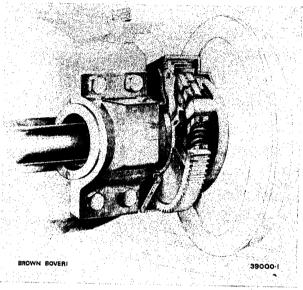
Individual axle drive for electric vehicles. Showing hollow shaft secured to driving motor housing, gear drive and spring coupling.
